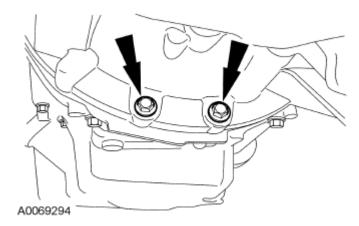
Locating Dampener Bolts Courtesy of FORD MOTOR CO.
